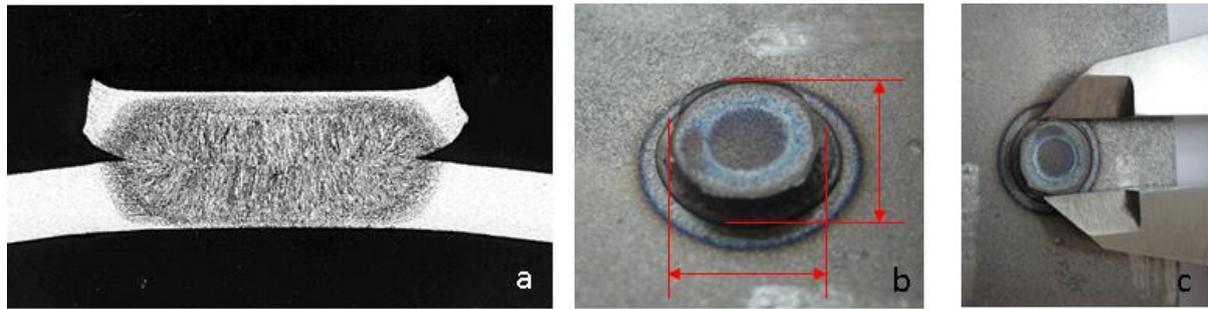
a. Cross section showing excess sheet material, b: weld dimensions to be measured, c: correct positioning of the Vernier calliper Source: TWI
